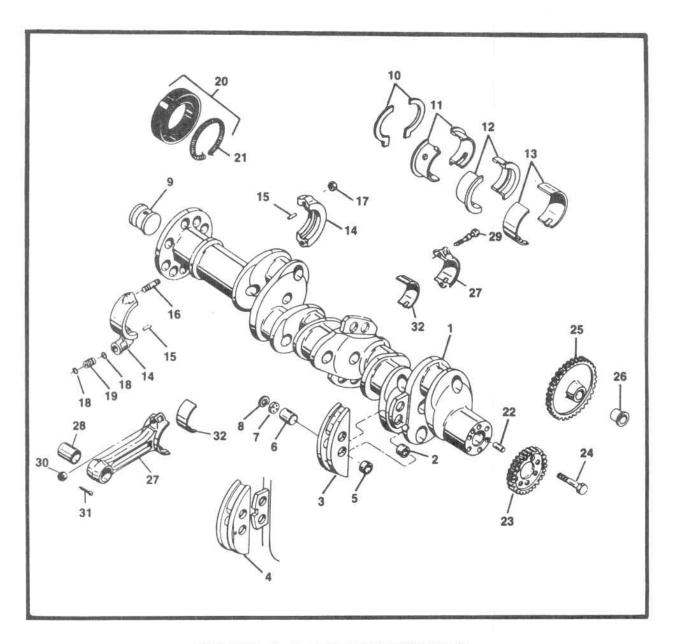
CRANKSHAFT ASSEMBLY.
